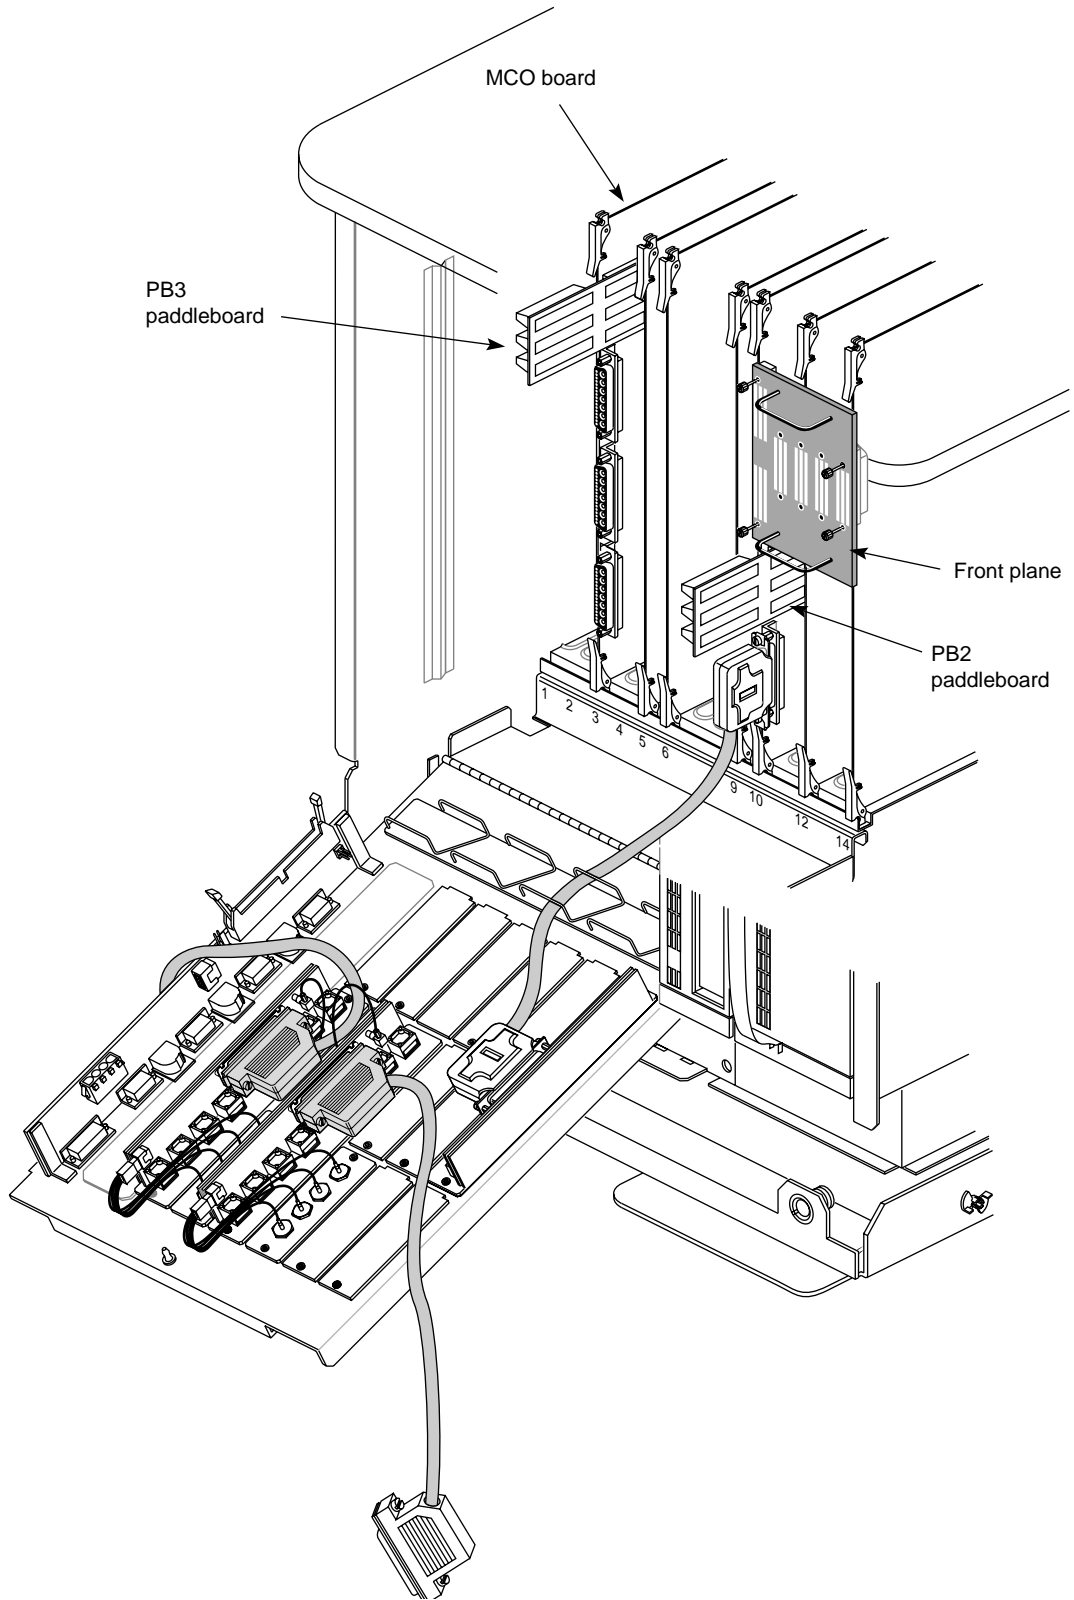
MCO and DG2 Boards in Chassis With Paddleboards Attached
